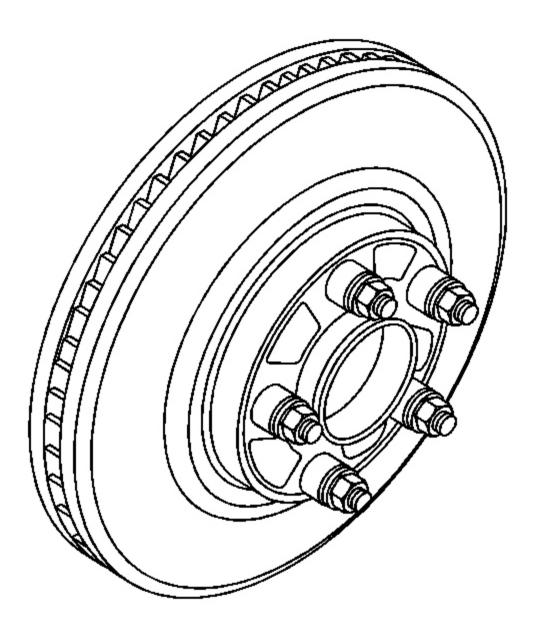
Identifying Brake Rotor Courtesy of GENERAL MOTORS CORP.
